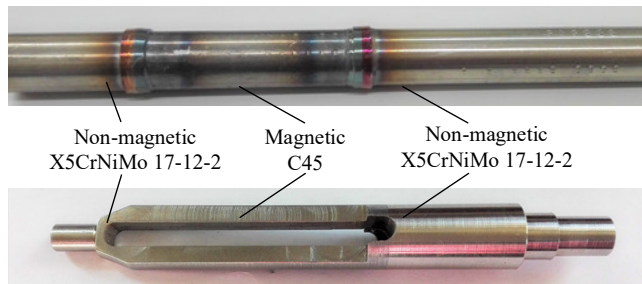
Hollow shaft made from different materials by friction welding technique.
